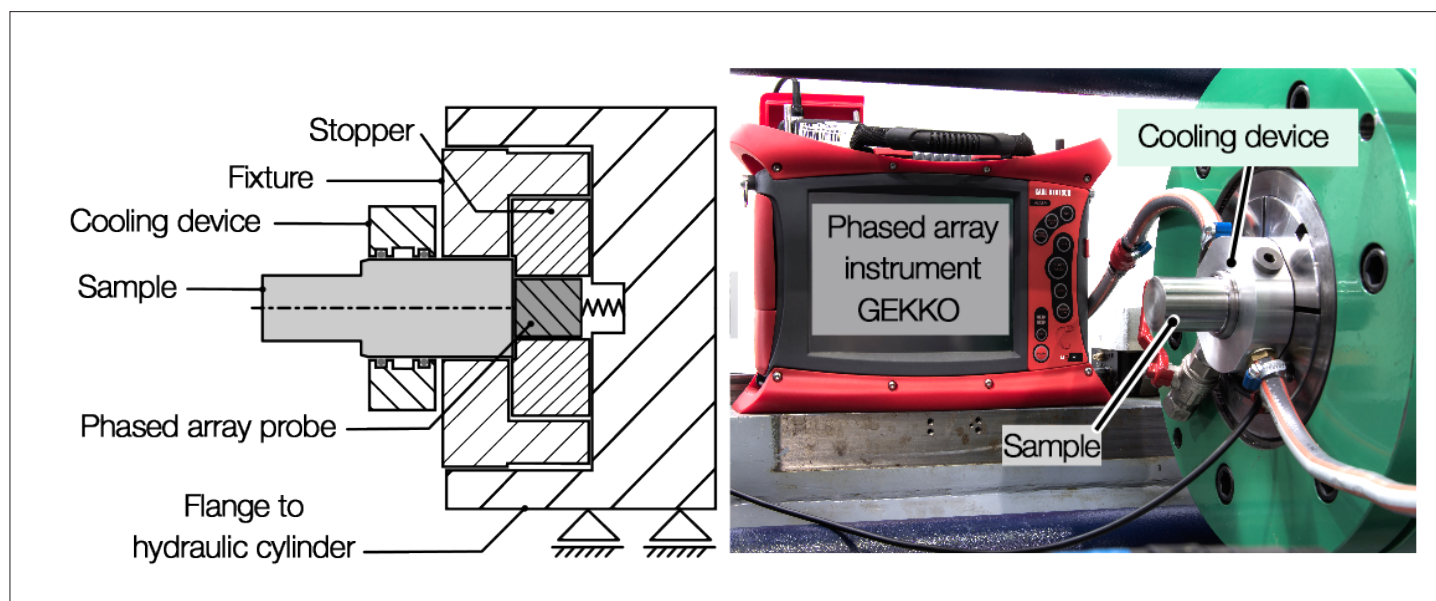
Drawing and photo of the setup with the statically mounted part of the sample before the welding process
